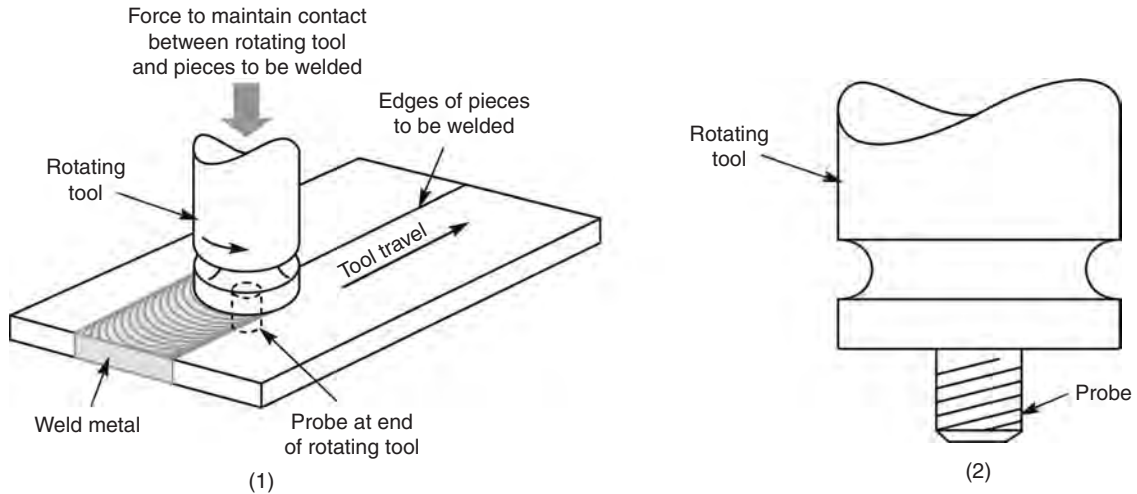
(1) Schematic of friction stir welding; (2) detail of probe.
